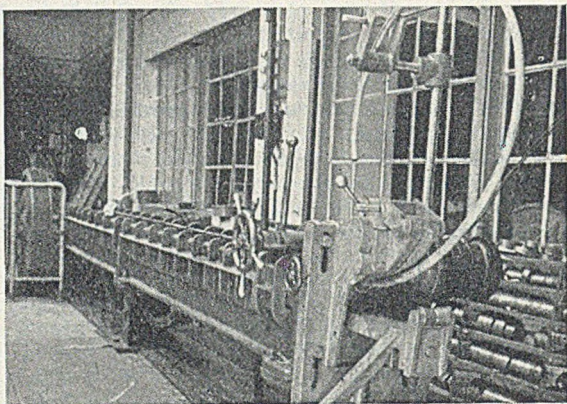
Straightening the Ring in a Draw-bench Die.
